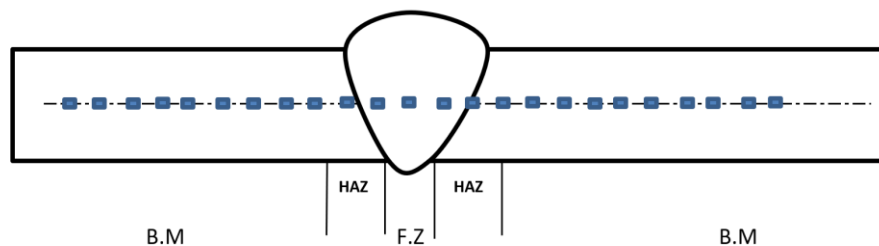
Taken points of TIG and MIG welded samples.
